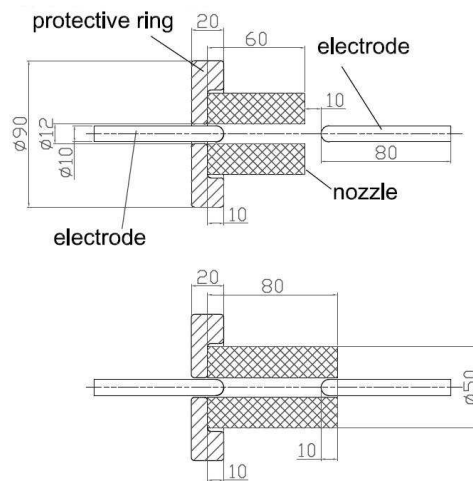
Simplified test arrangement plug located outside of the nozzle (top, 60 mm-D60) and inside (bottom, 60 mm-D80)
